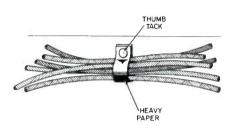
Drawing Illustrating Means of Securing Cables to Cabinet.
